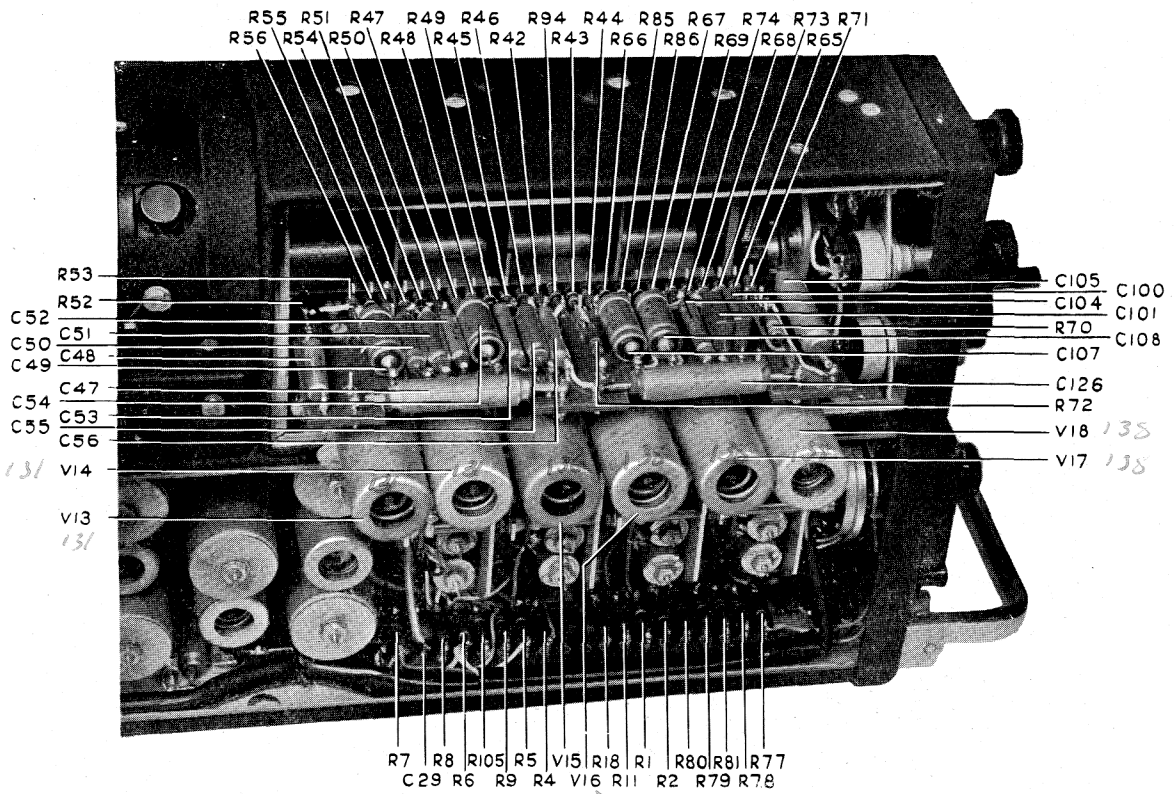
RECEIVER TYPE AD.7092. COMPONENT LOCATION, LEFT HAND SIDE, UPPER FRONT COMPARTMENT, VALVE DECK HINGED FORWARD.
